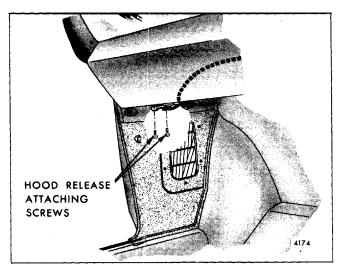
Hood Latch Release Assembly Attachment - H-15 and 77 Styles
